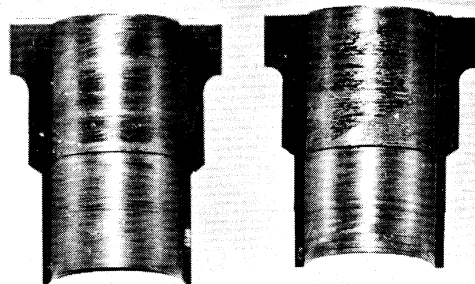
Material 222. View of drilled surface produced on piece No. 2 (left) and piece No. 1152 (right) before drill was replaced.
